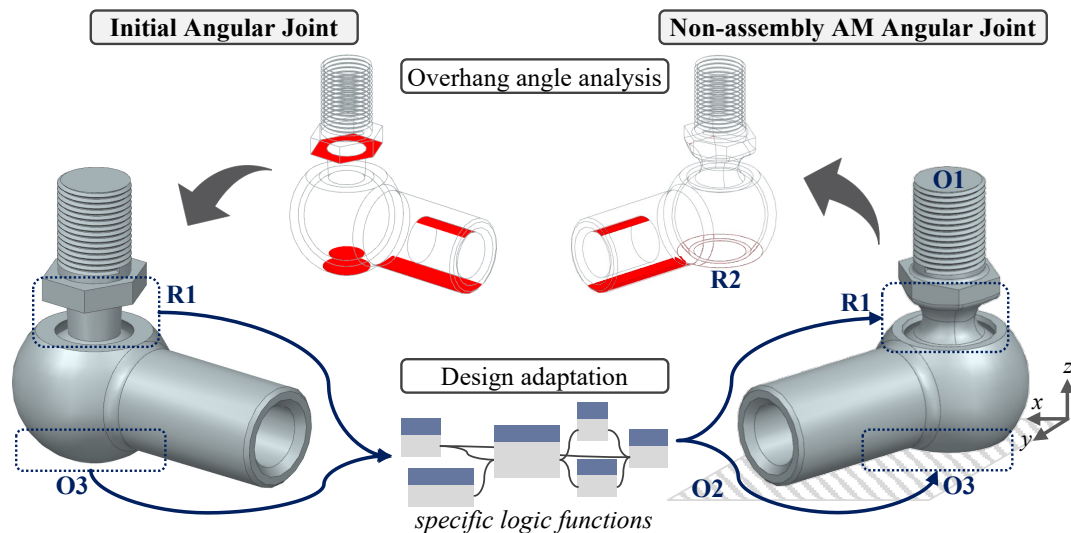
Adaptation of the initial design for FLM as non-assembly mechanism.
